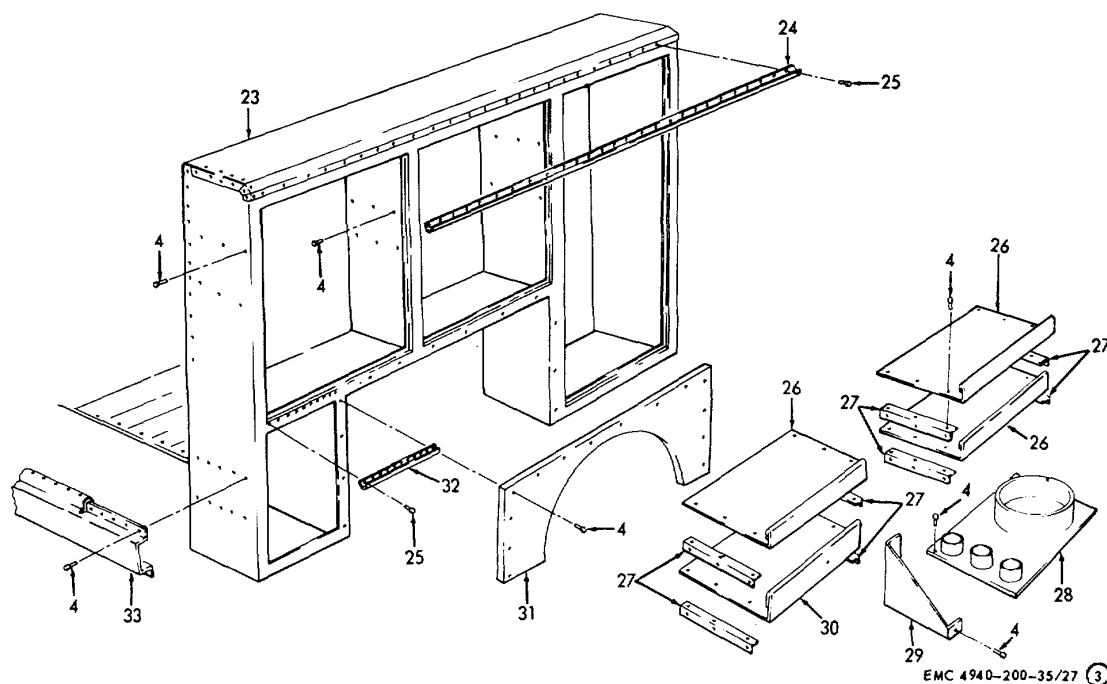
Shop set body, model SECM, disassembly and reassembly.
